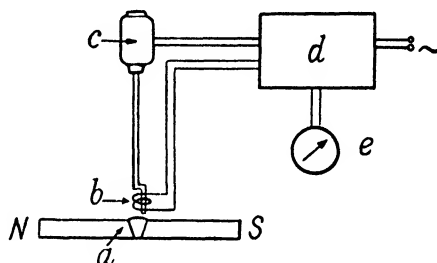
MAGNETIC INDUCTIVE WELD TESTING METHOD
